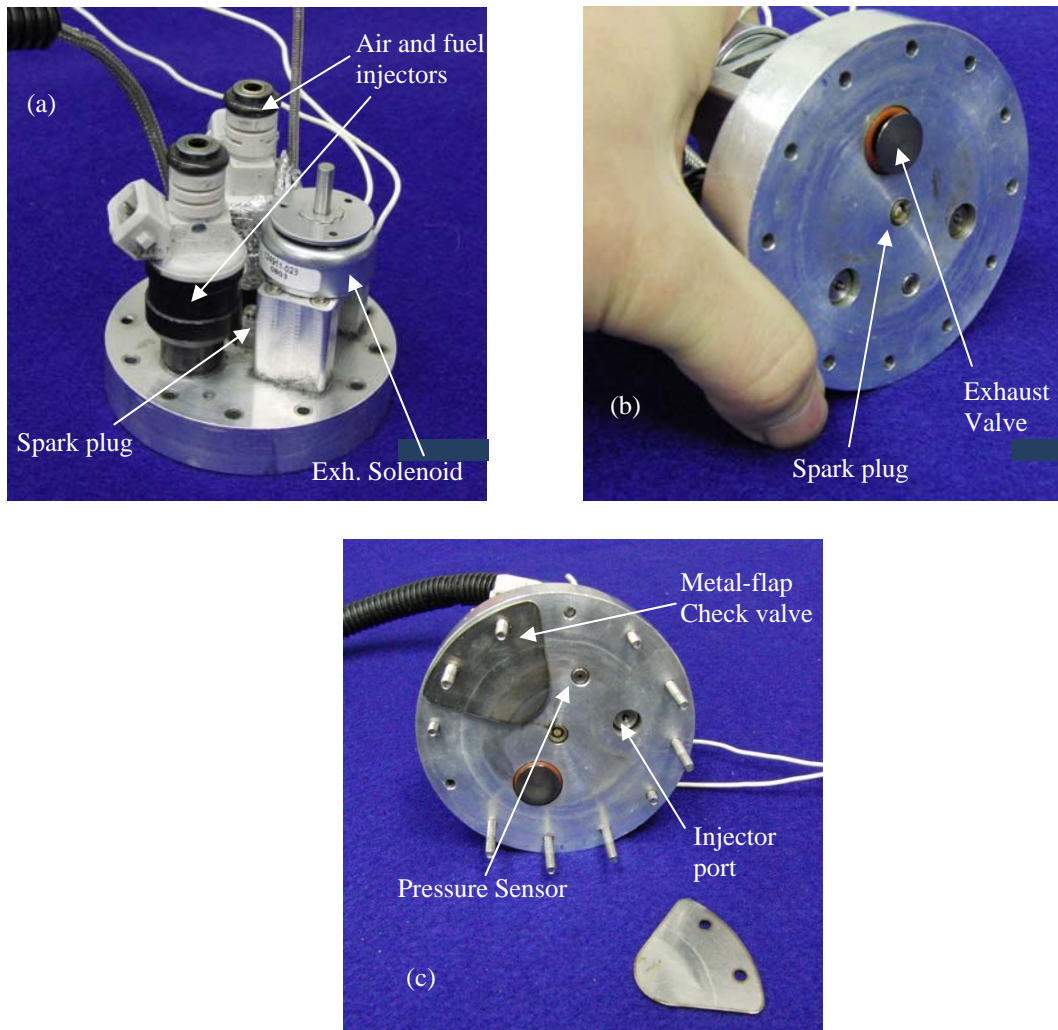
(a) Top view of combustion head. (b)interior view of combustion head with exhaust valve open. (c) interior view showing check valves for injectors
